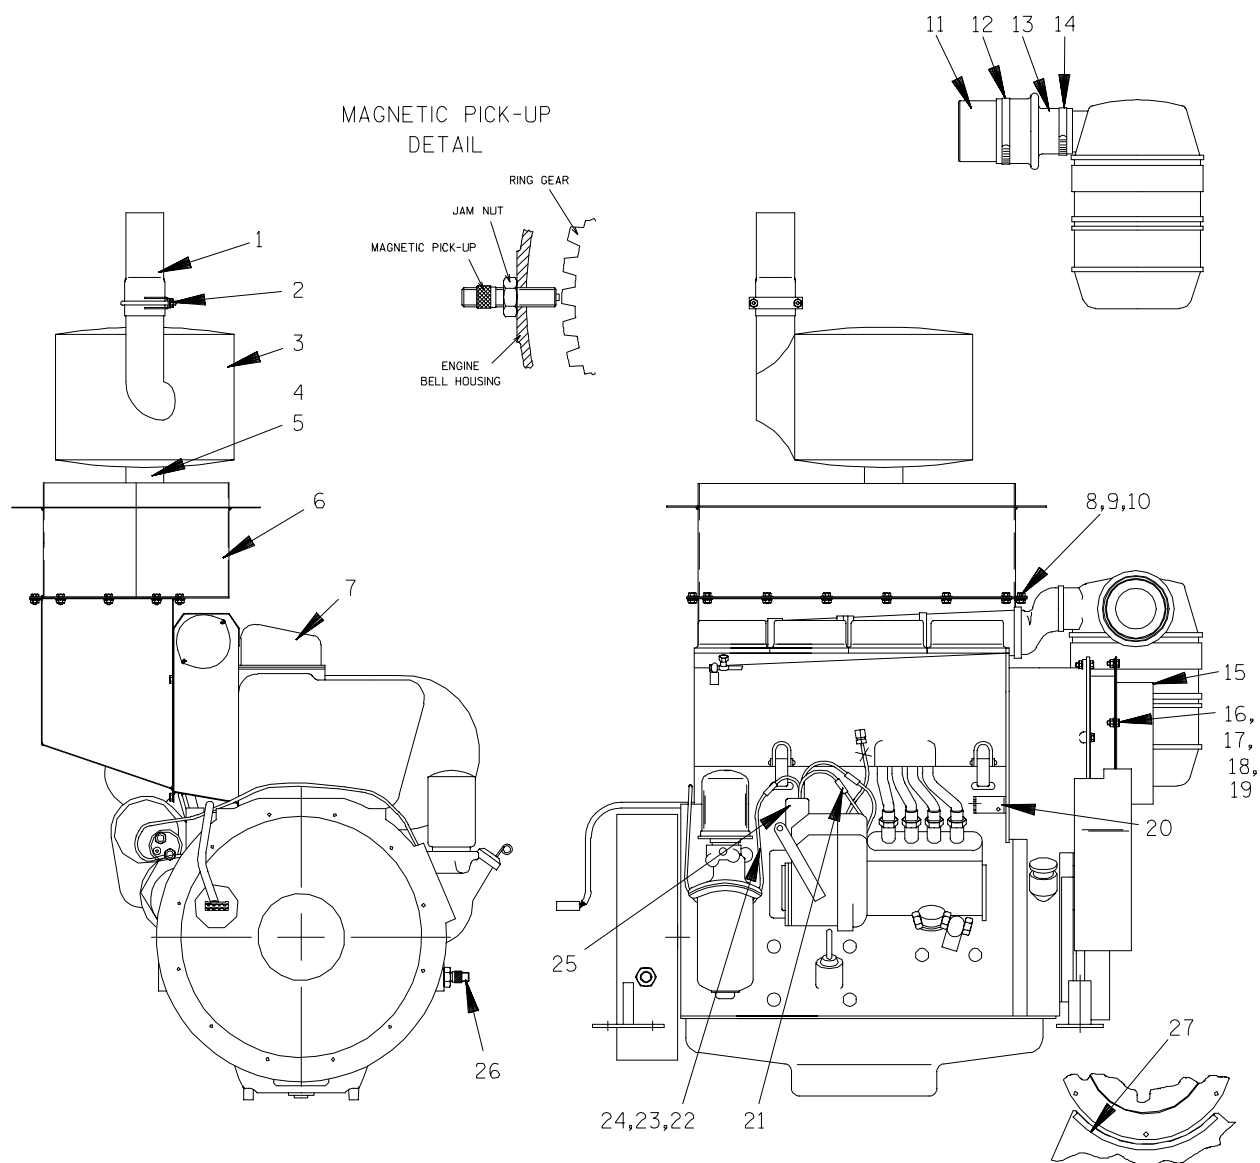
T6A3-F4L-SPA Engine Modification Assembly
